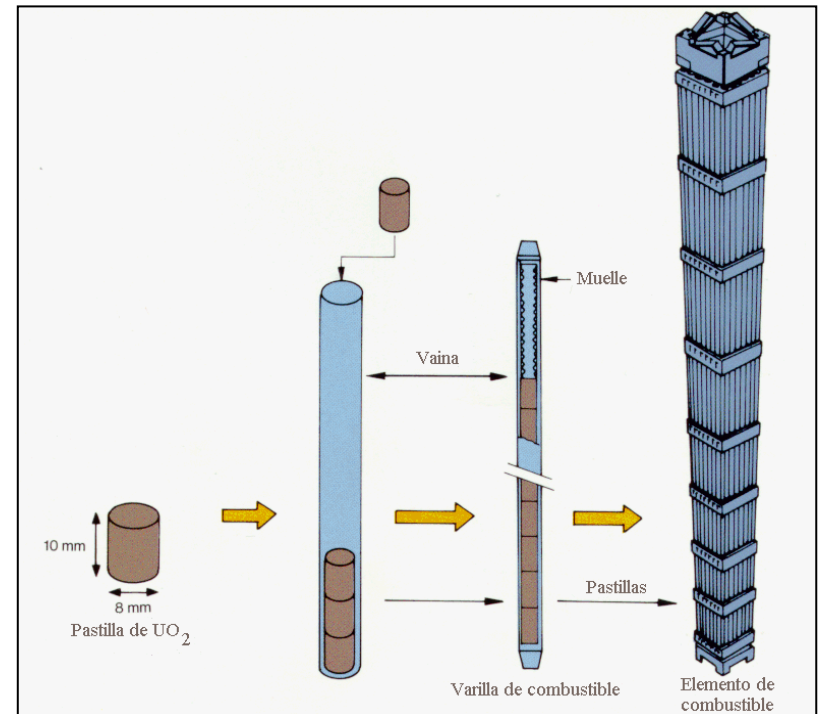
Figure. A typical 17x17 Fuel Assembly for a PWR/Westinghouse
